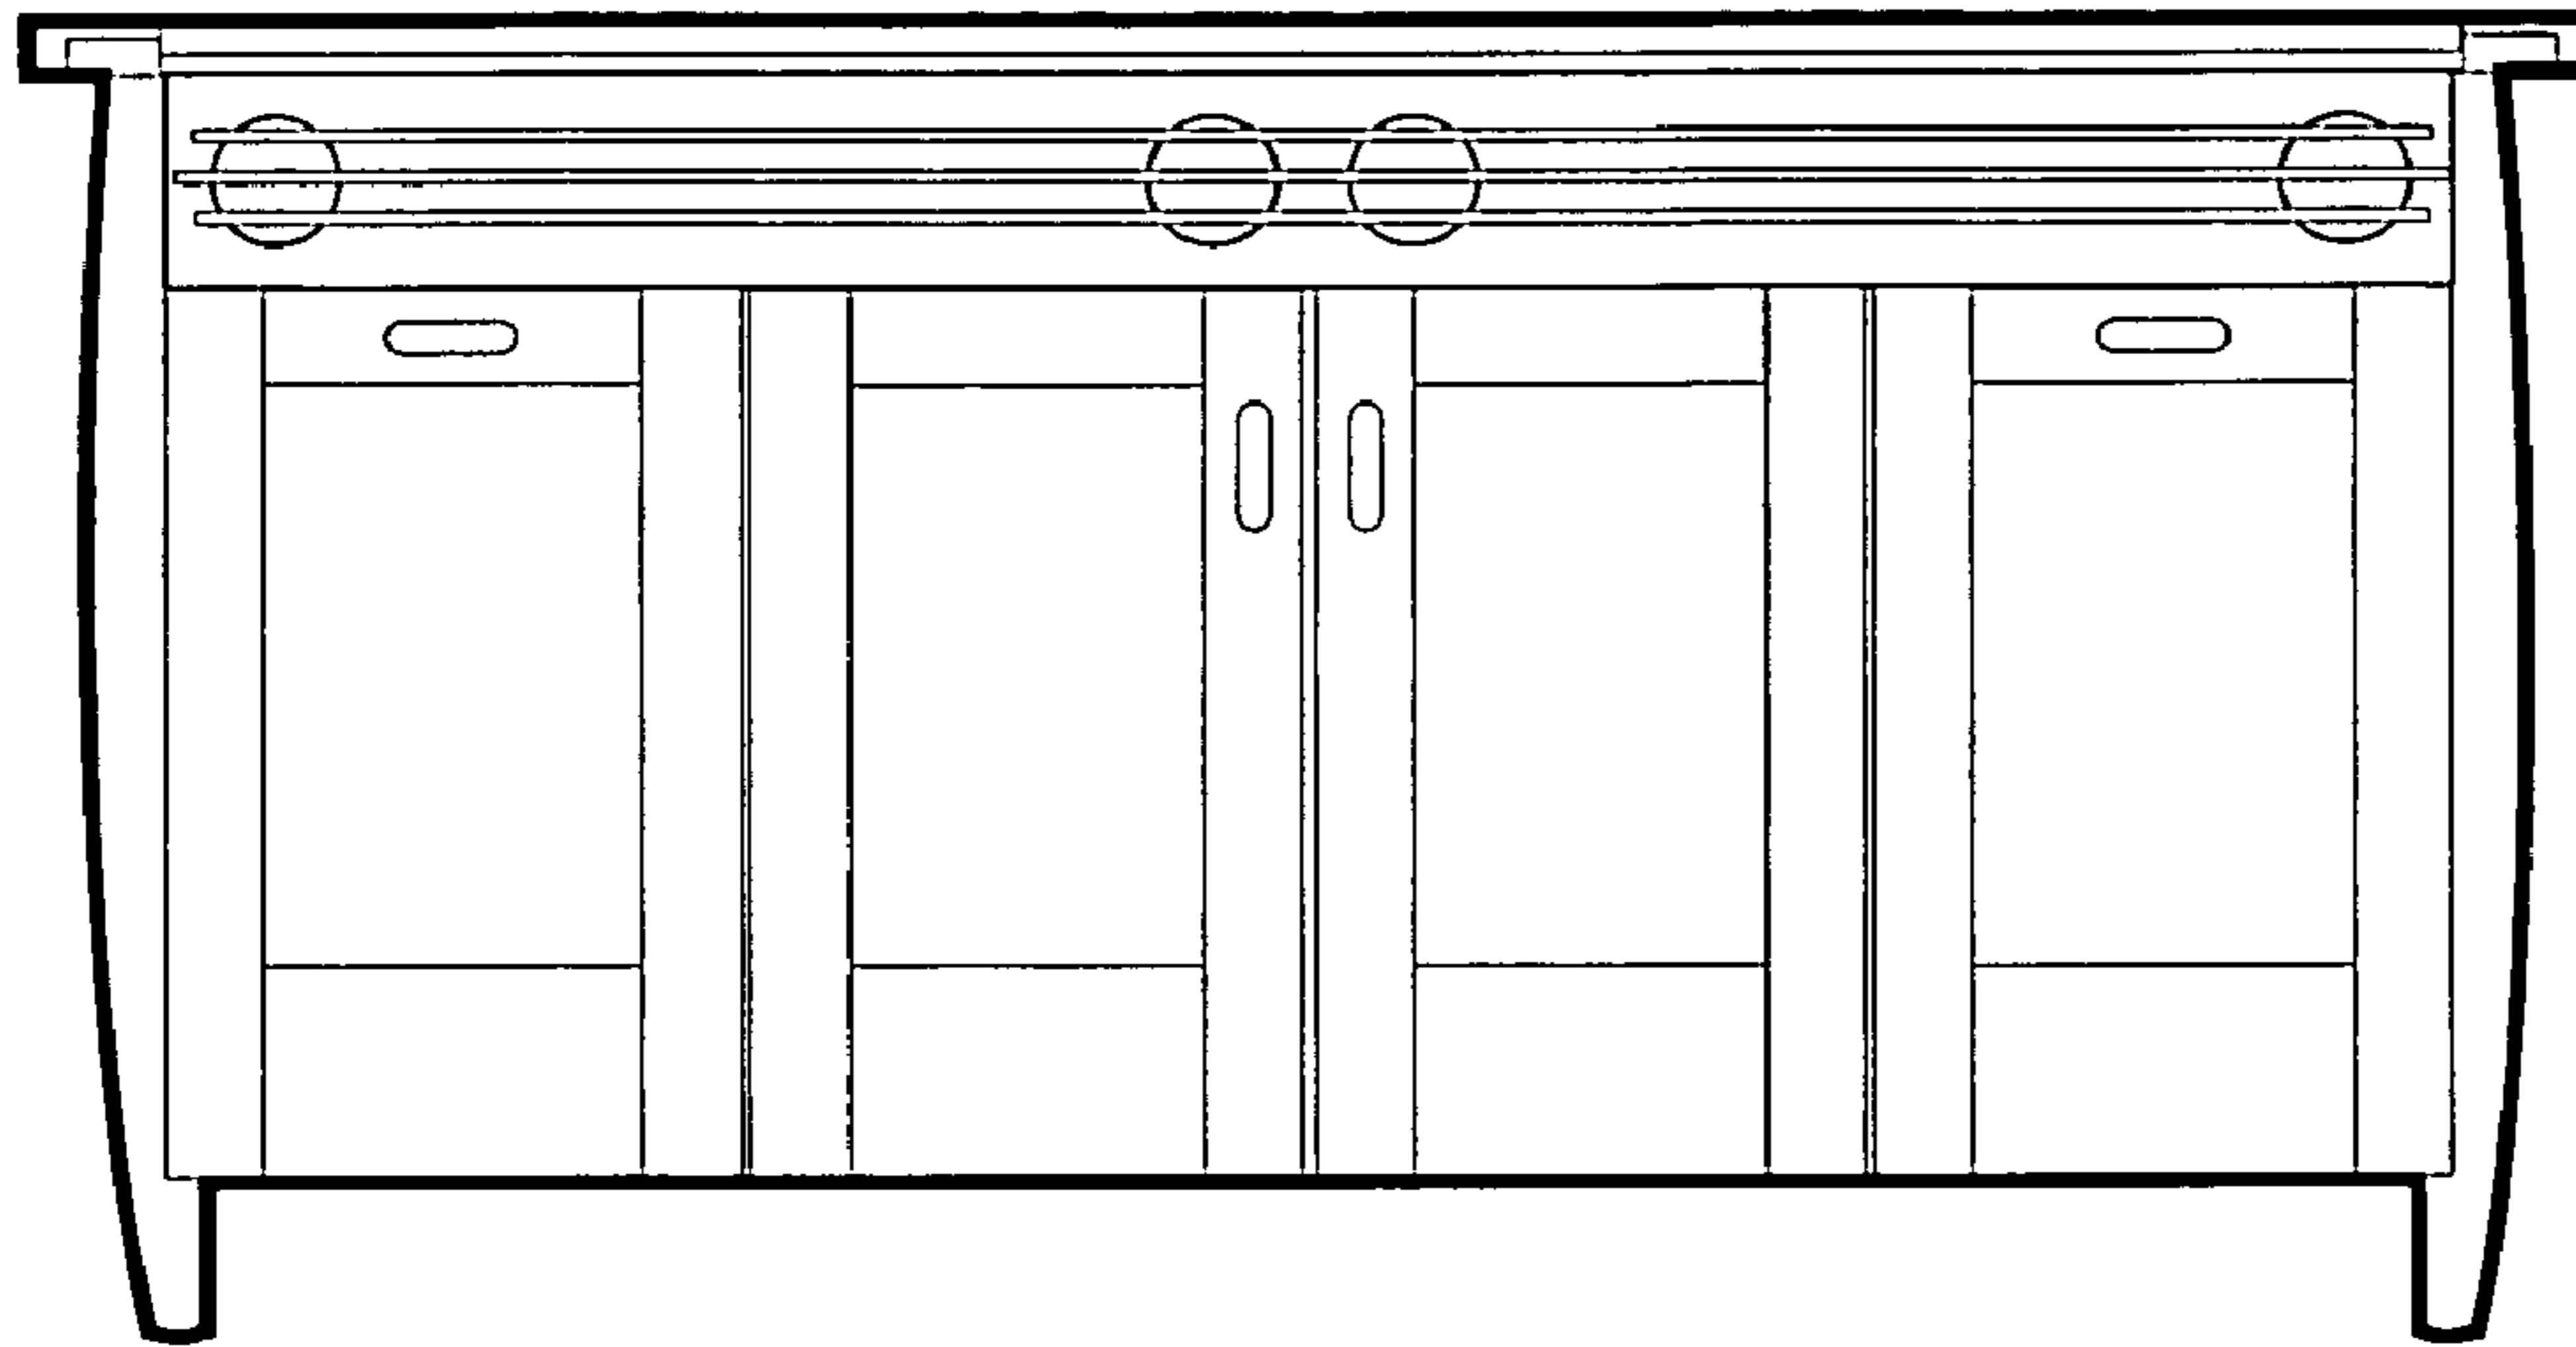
Front elevation of entertainment center furniture with doors closed having alternative embodiment of invention.
